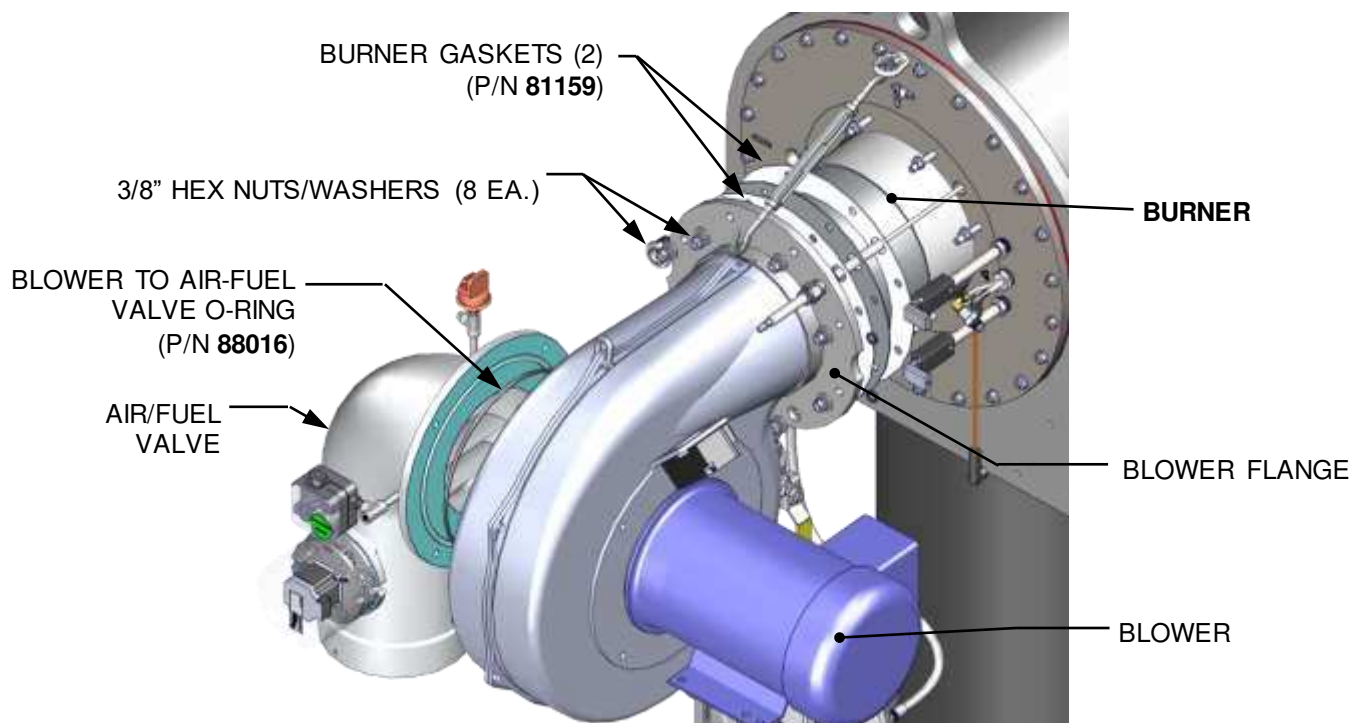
Burner Assembly Exploded View – BMK5000 & 6000
